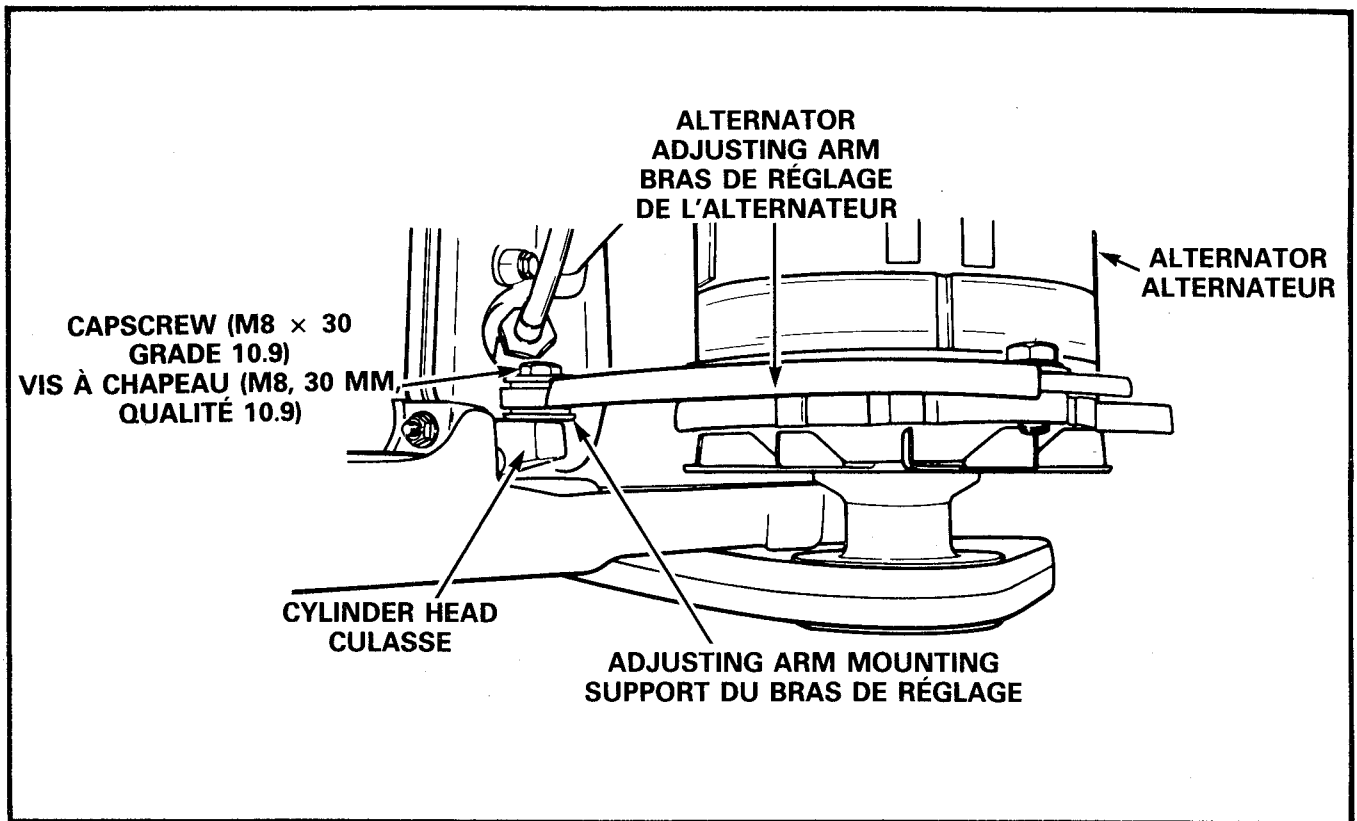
Removal/Installation of Alternator Adjusting Arm and Mounting
